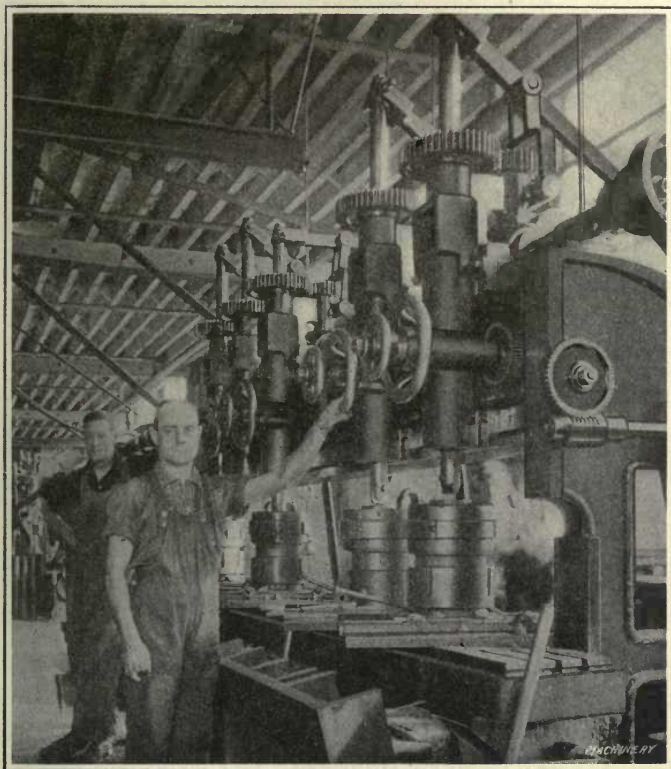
Boring out Cavity of 4.5-Inch Howitzer High-explosive Shell
